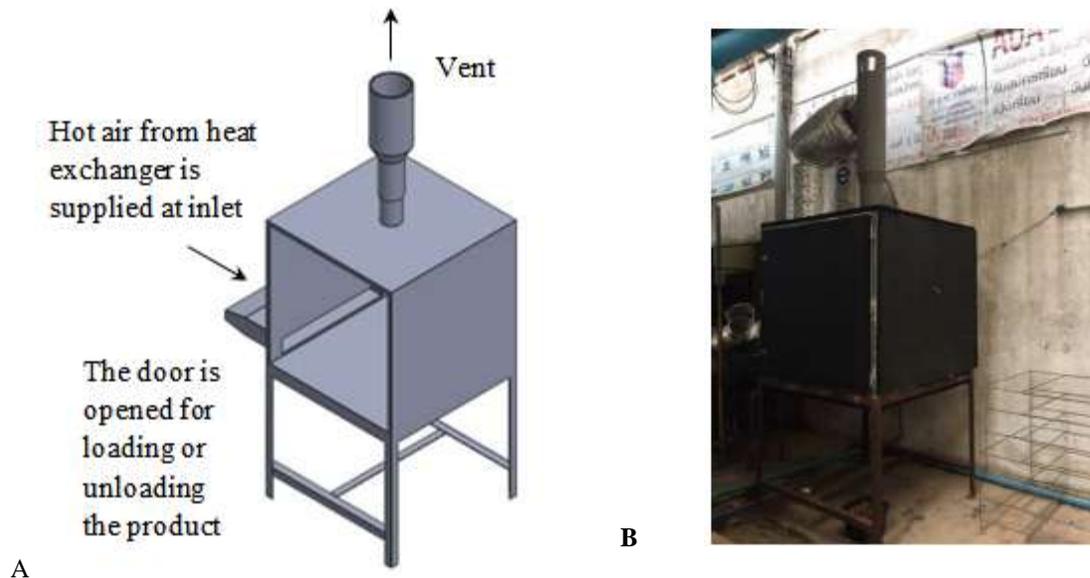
View of A) the CAD model of drying room, B) real drying chamber and hanging rails of rubber sheet
